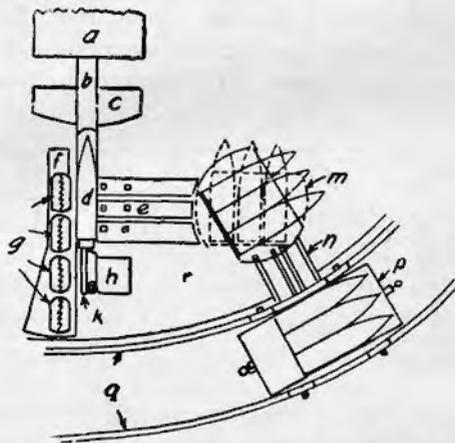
Loading mechanism, 16-inch barbette carriage.
